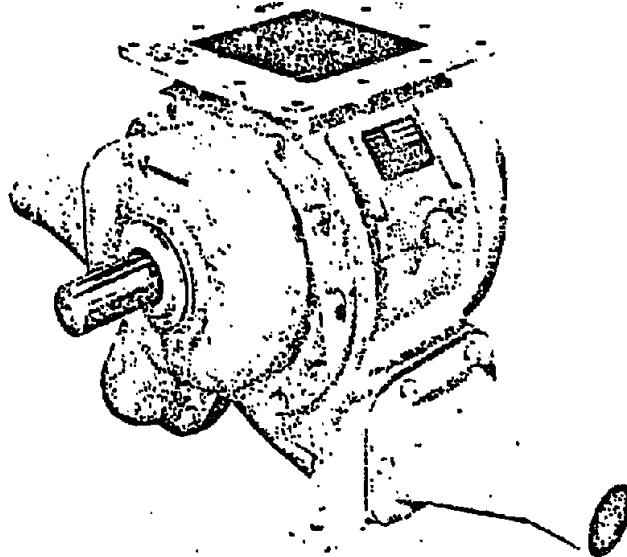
EXTERNAL VIEW OF AIR-SWEPT DOUBLE ENTRY FEEDER VALVE (CEA-CARTER-DAY COMPANY)
